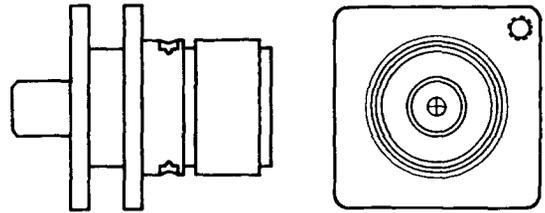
KS-16919, L2 and L3, Coaxial Jack
